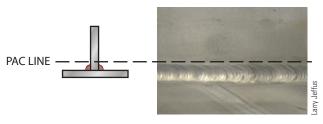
Recycle weld test plates when possible.
